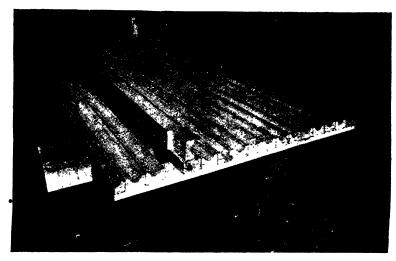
Narrow pieces held together by cross members housed in rebates OR GROOVES HOLD THIS 8-FT. BY 4-FT. MOULD PATTERN DIMENSIONALLY CORRECT AND FREE FROM WARP OR SHRINKAGE BY THE TIMBERS
